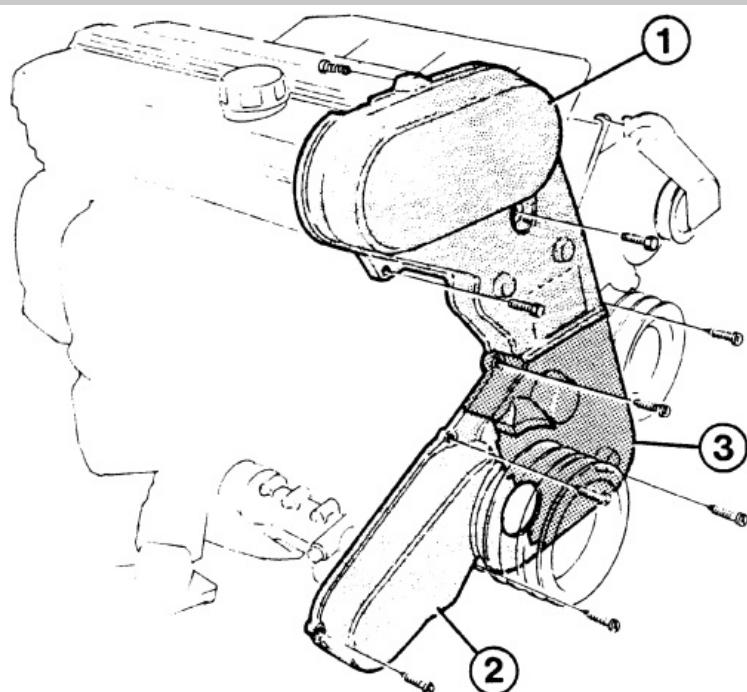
The B234F engine has a three-piece timing cover
